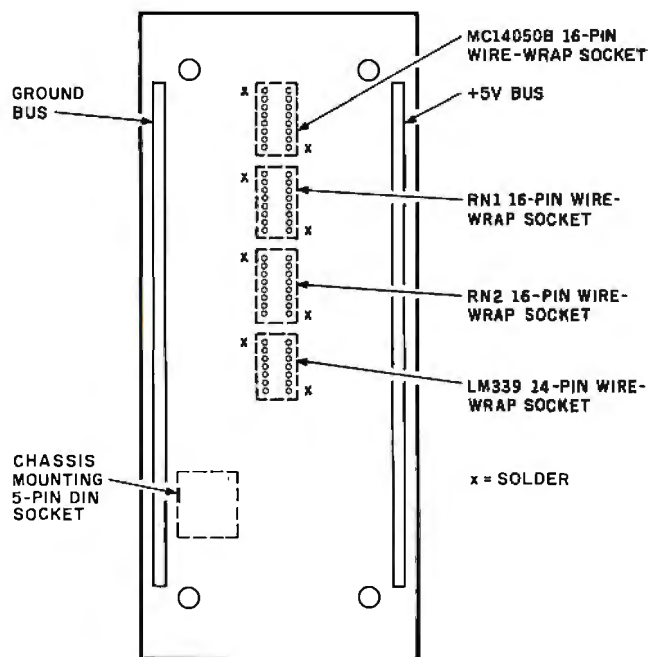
Underside of the A/D prototype board showing positions of ground and +5-V buses and solder points for the wire-wrap sockets.
